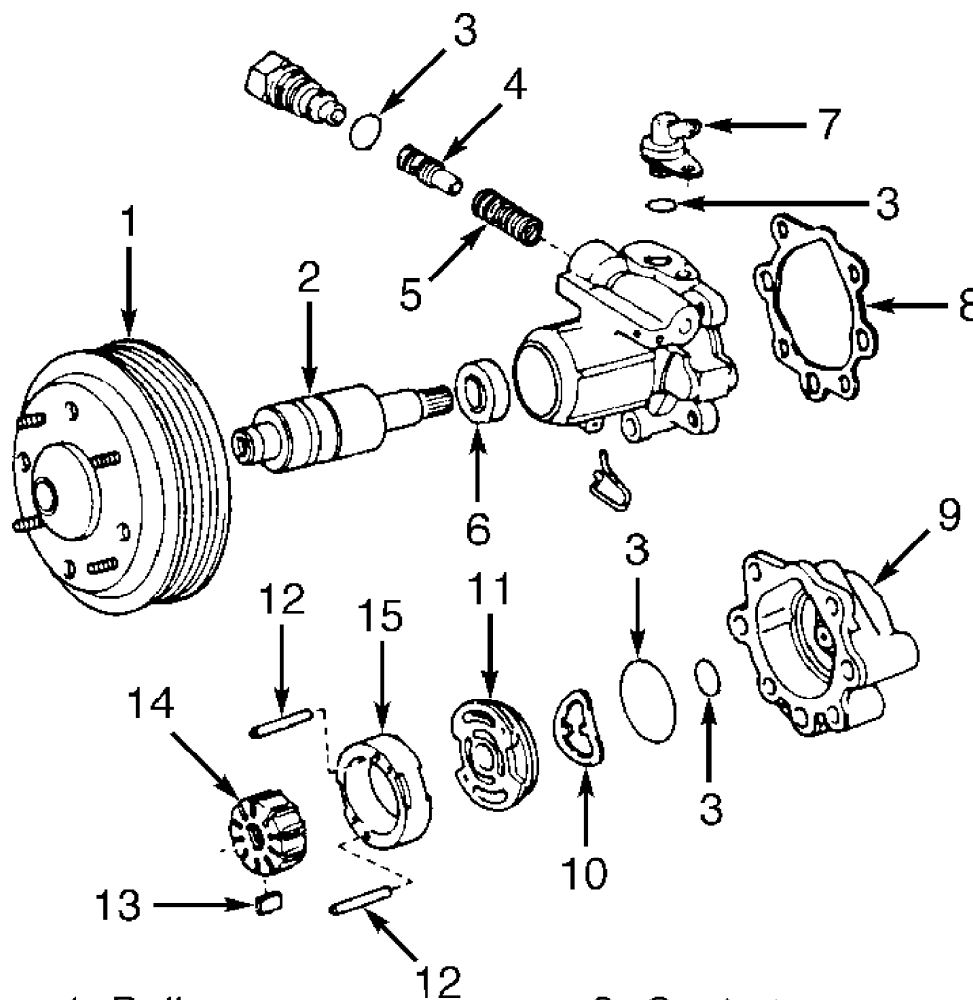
Exploded View Of Power Steering Pump (Paseo & 1997 Tercel)
